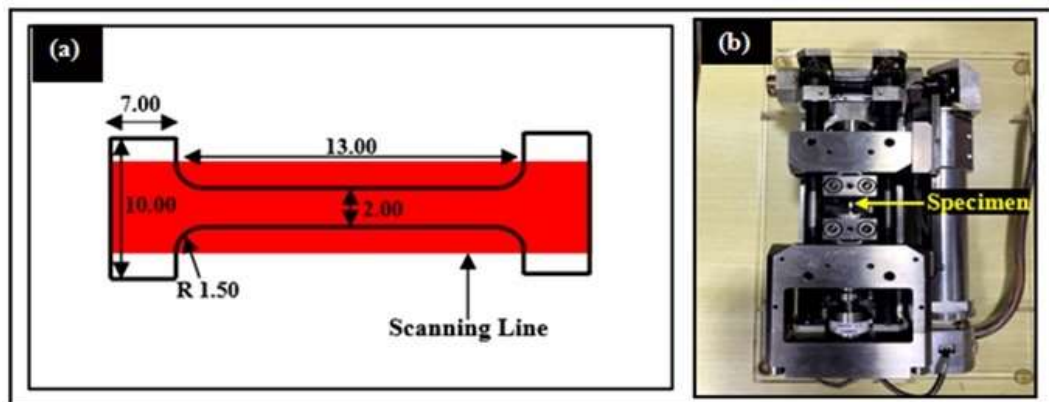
(a) Tensile sample (b) micro-tensile testing machine.
